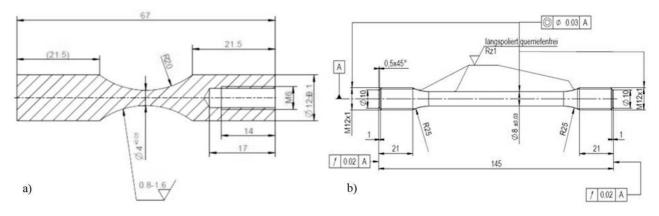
The shape and dimensions of fatigue test specimens used at room temperature high frequency loading (a) and for low frequency loading at 700 °C (b)
